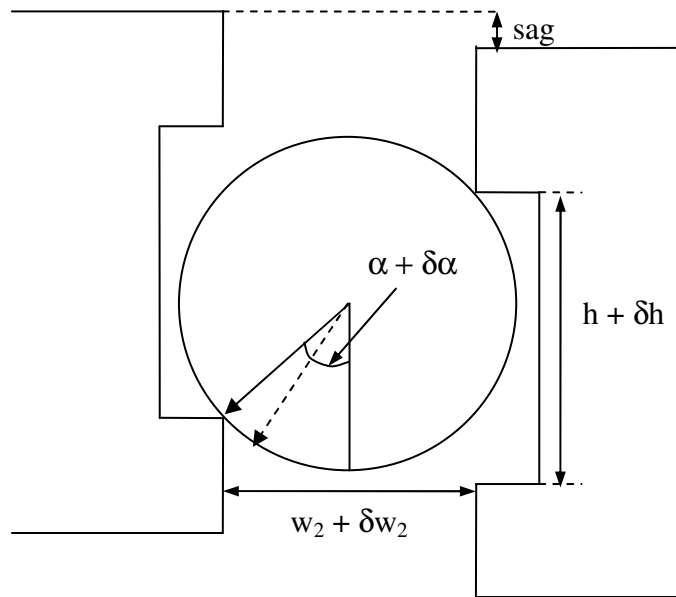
Schematic of the point-contact bearing showing the dimensions including fabrication tolerances.
